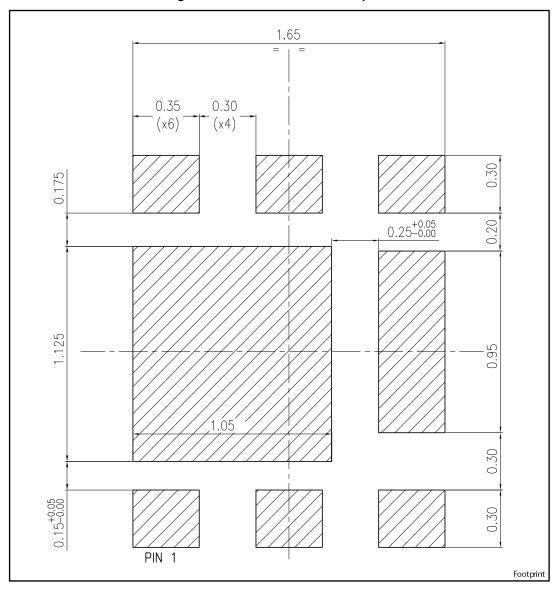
Drawing dimension PowerFLAT™ 2 x 2
